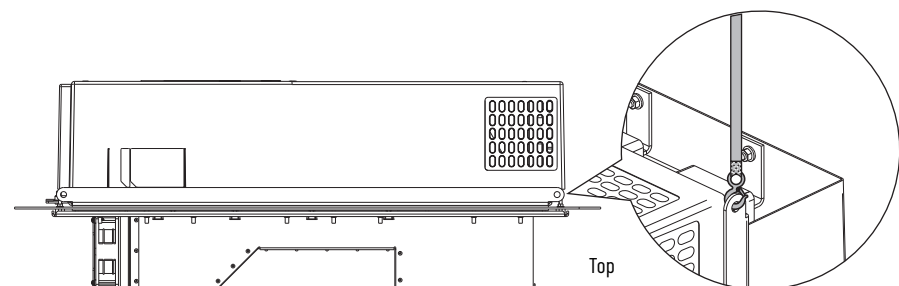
Wall Mount Frame 7 Lifting Points - Four Places
